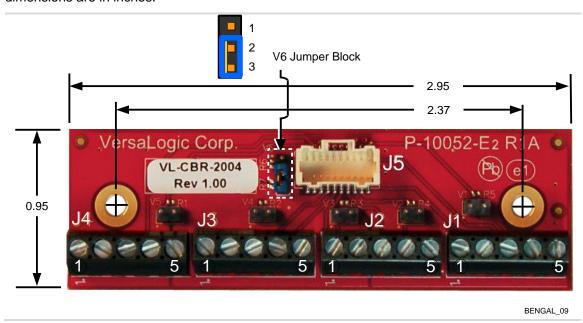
VL-CBR-2004 Dimensions, Connectors, Jumper Blocks, As-Shipped
